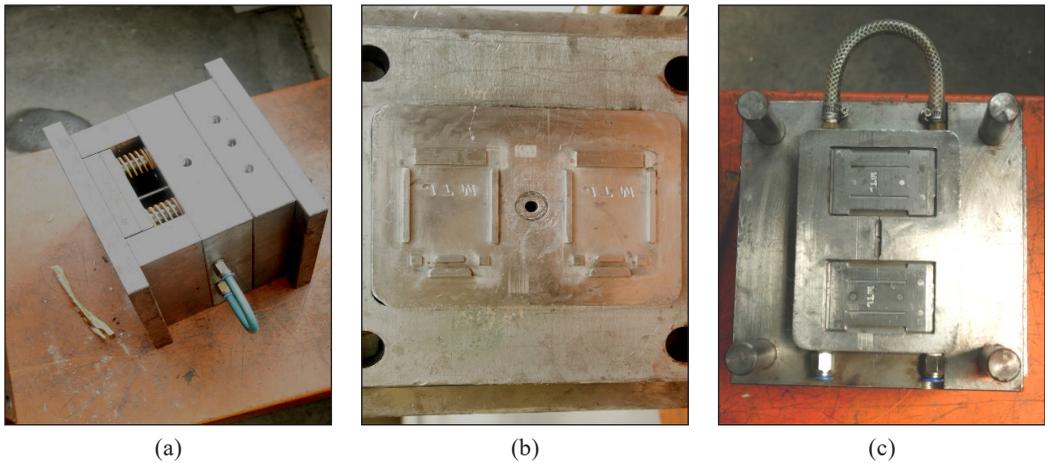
(a) NTP mould set; (b) Female mould of NTP; and (c) Male mould of NTP
